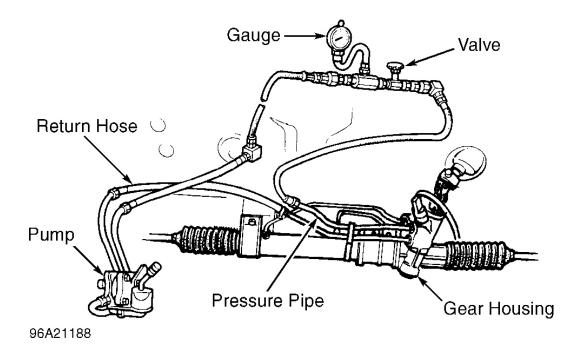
Connecting Pressure Gauge/Valve (Typical) Courtesy of MAZDA MOTORS CORP.
